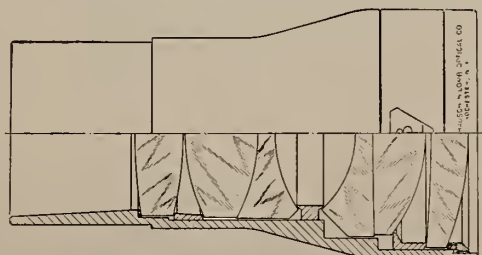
Cross-section showing the mounting details of the 4-inch Cinephor 16.
